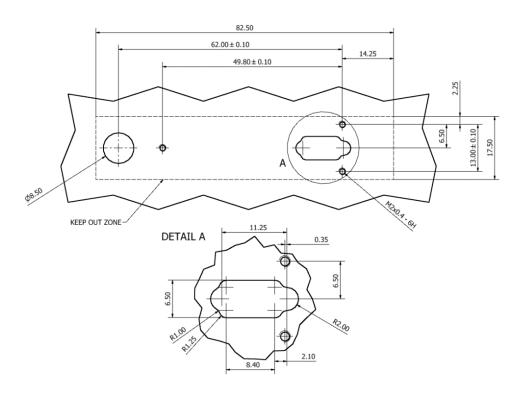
Panel cut-outs required to mount CubeMag Deployable
